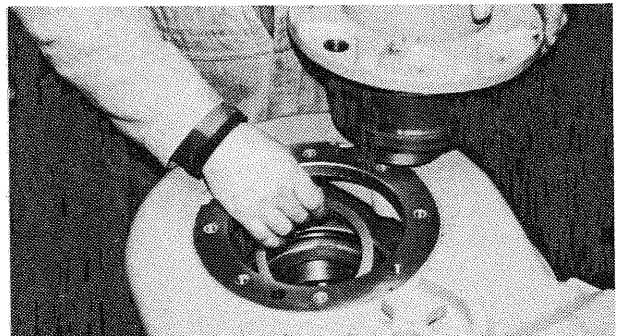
Drum & Freespool Assembly (5 of 7)
